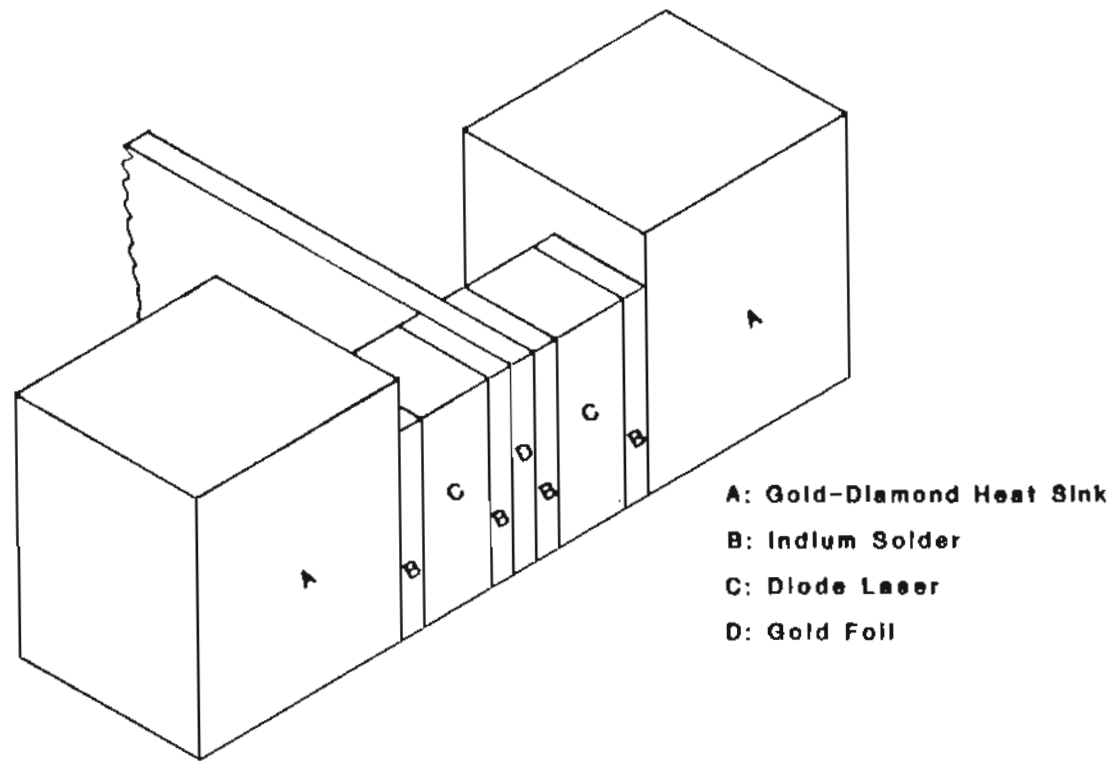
Detail drawing of the dual diode laser mount. Shown are the diode lasers and their heat sinks and indium bonding pads.
